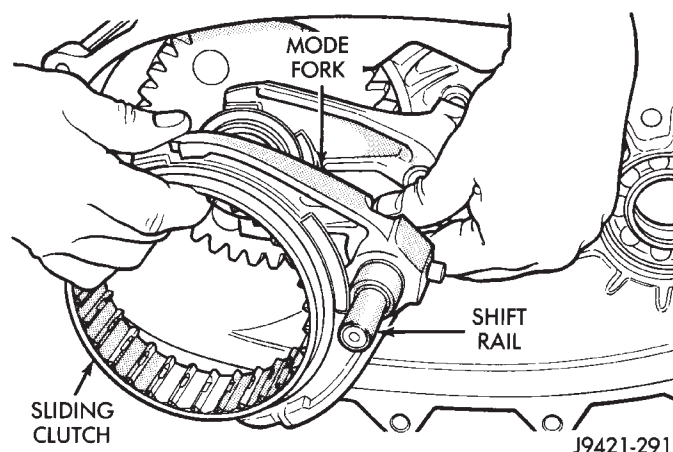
Mode Fork, Shift Rail And Sliding Clutch Removal
